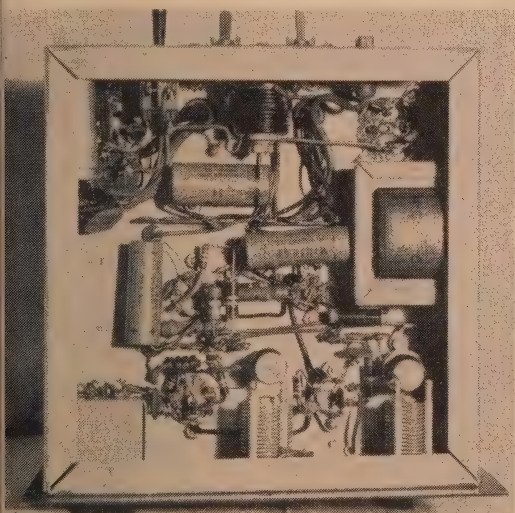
Bottom view of transmitter chassis. r-f coils of transmitter are wound on Lucite forms and are mounted behind C40 and C44. Placement of major components is shown in
